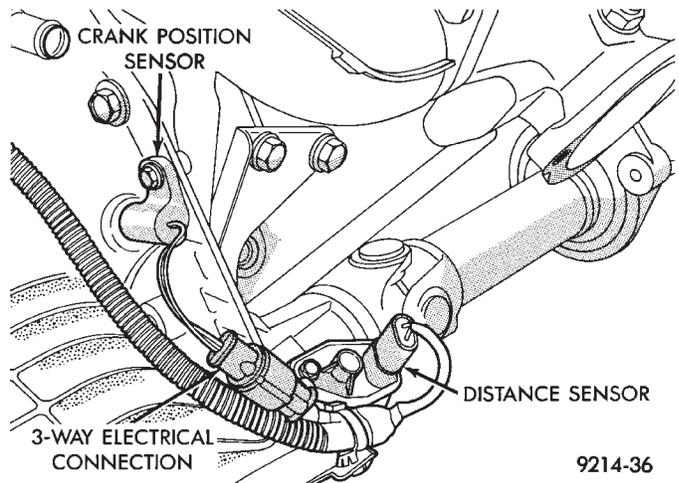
Crankshaft Timing Sensor—3.3L and 3.8L Engines
